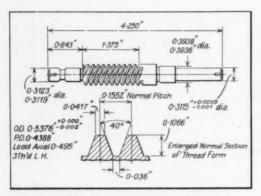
Thread-ground driving worm shaft for the National Class 31 accounting machine
